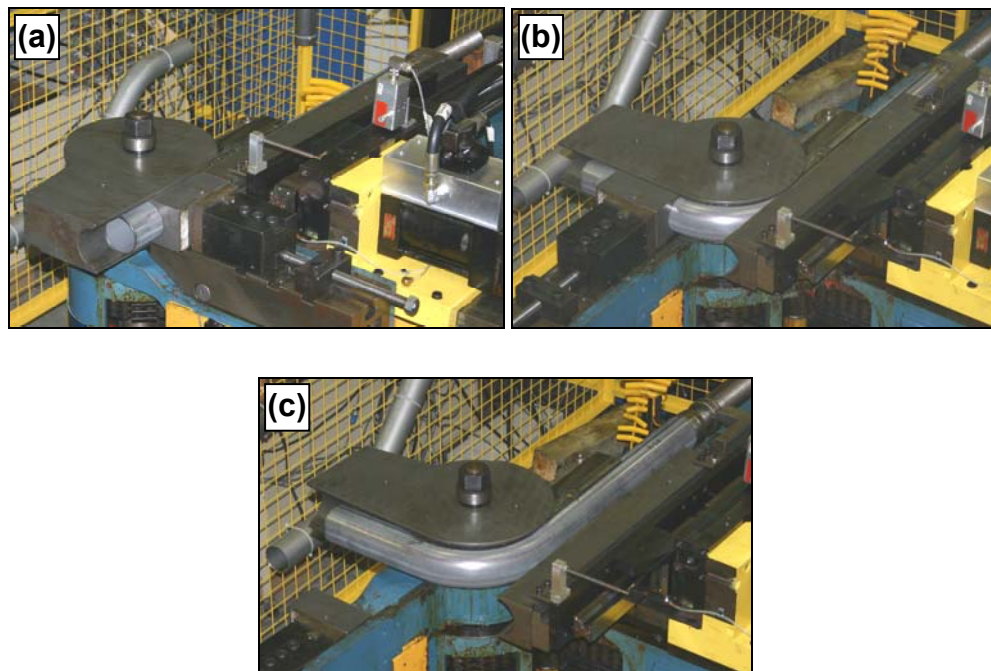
Tube bending sequence (a) after clamping; (b) after rotation of the bend die; (c) after retraction of the bend die, clamp die and pressure die
